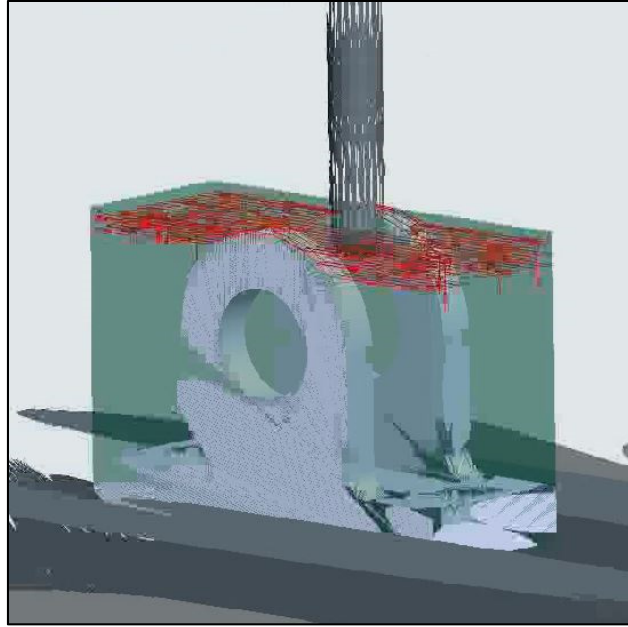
Creo CNC Tool path rendering for Torque Cell to Micro-RAT part.
